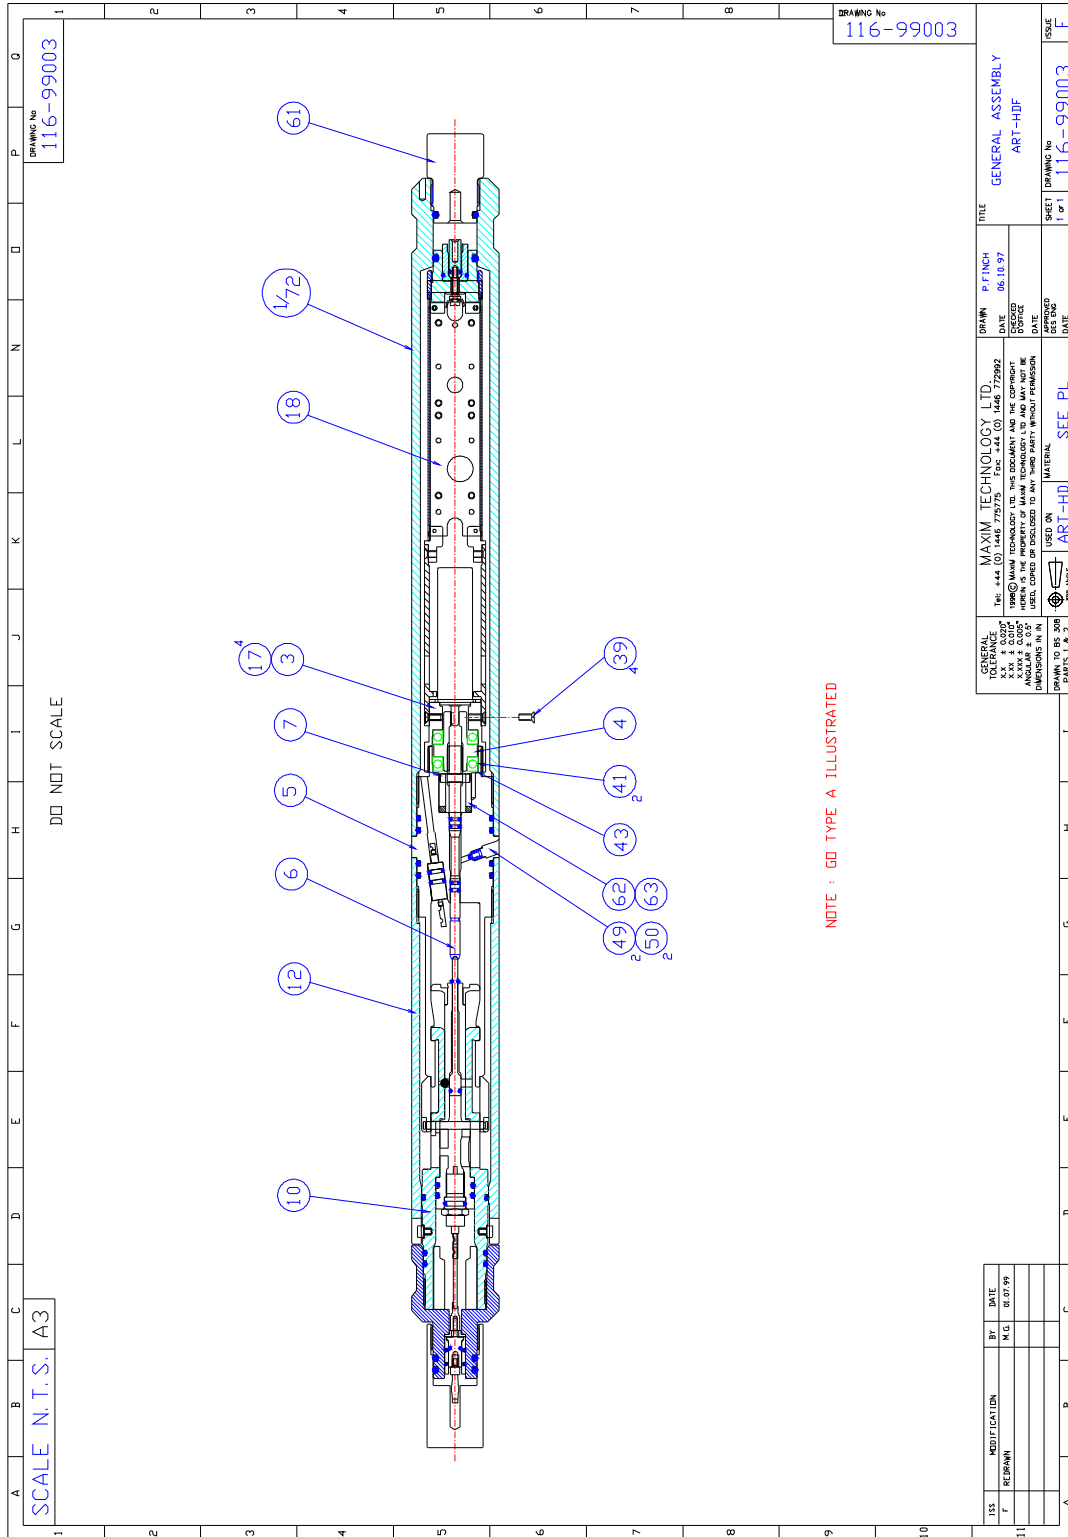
General Assembly Drawing, ART-H - 116-99003-F
